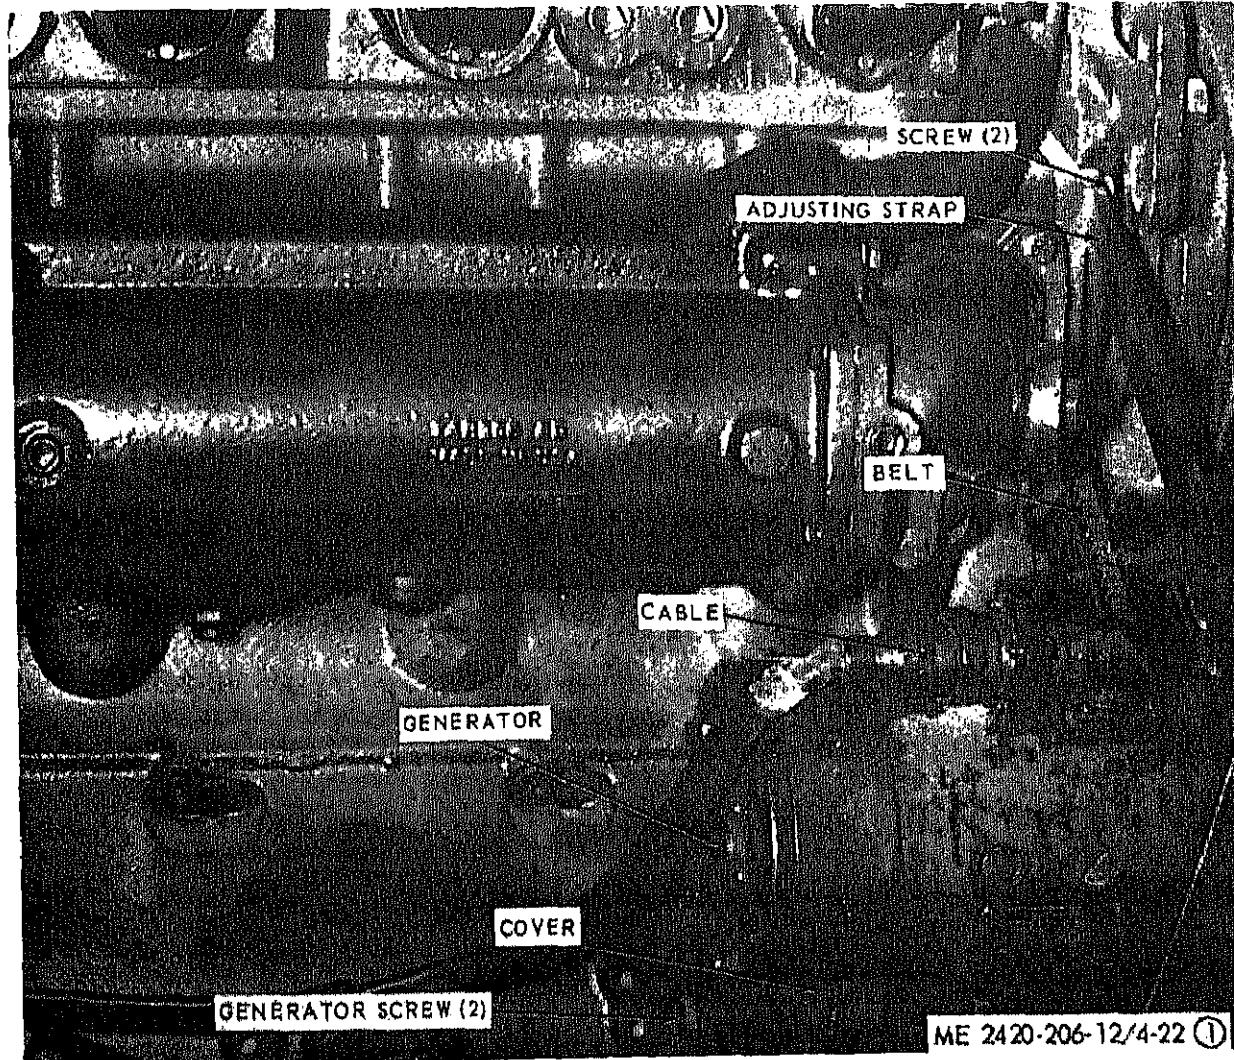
Generator repair, removal and installation (sheet 1 of 2).
